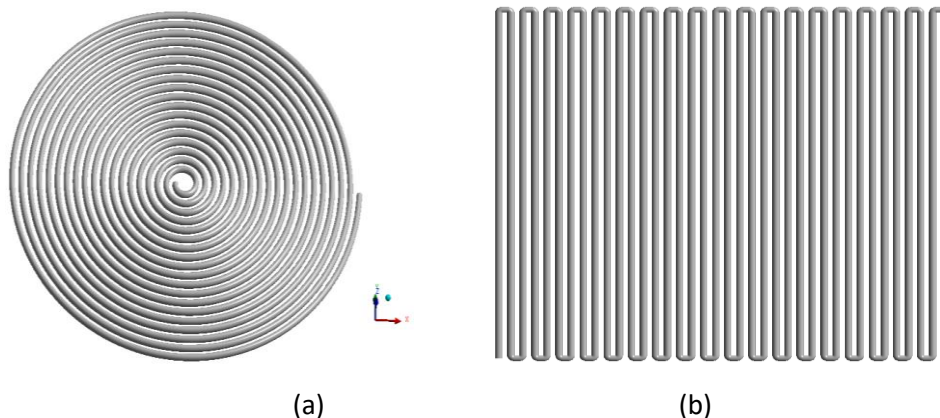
Solar receivers (a) Spiral shaped tube; (b) Vertical-tube shaped
